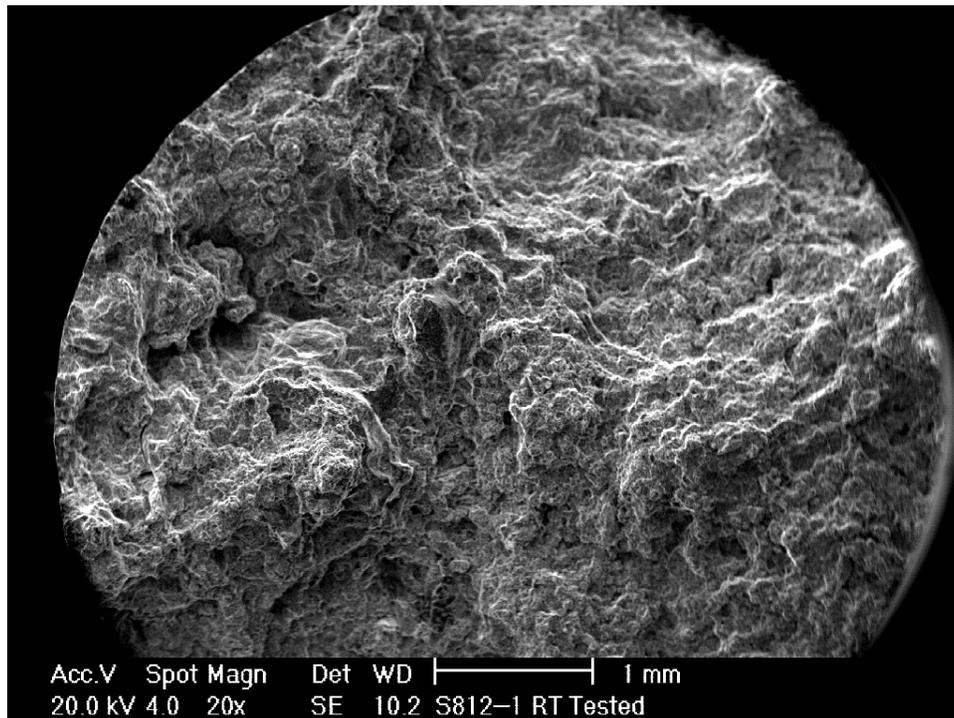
Fracture surface of S812 tensile tested at room temperature; showing brittle failure.
